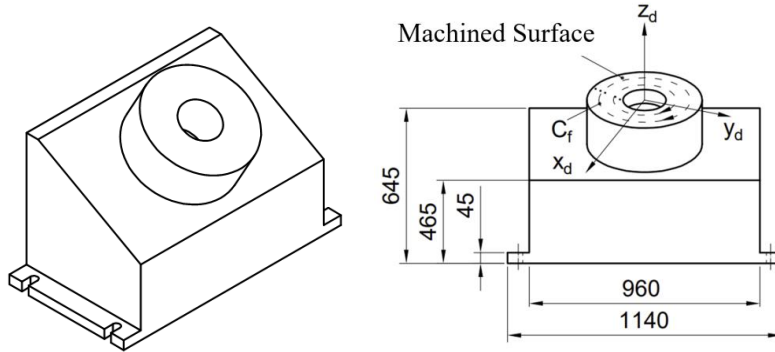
The workpiece with machined surface and C_i forming curve on the surface
